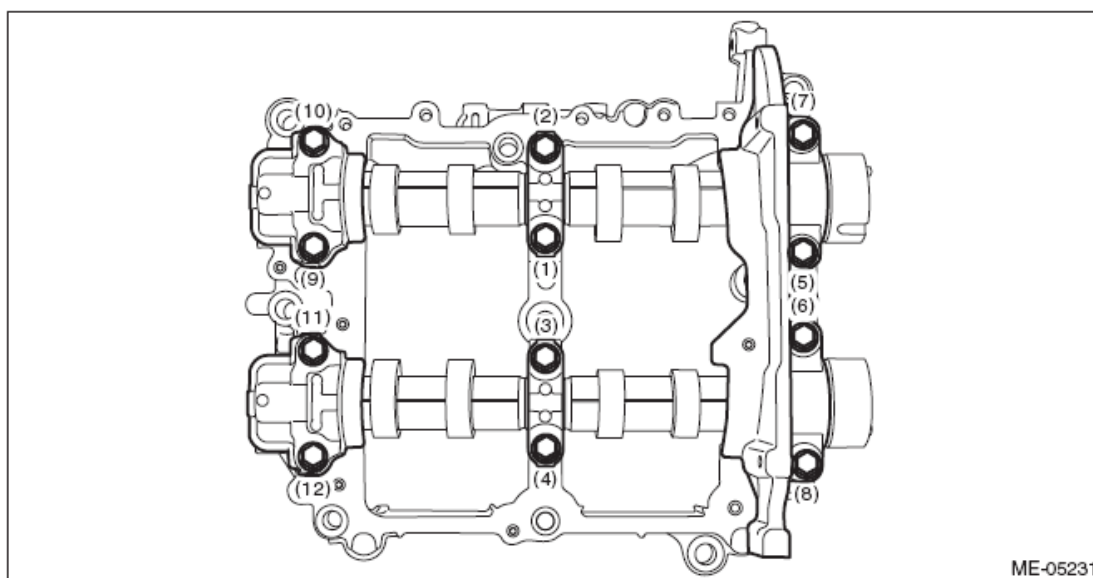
Identifying Camshaft Cap Bolts Tightening Sequence
